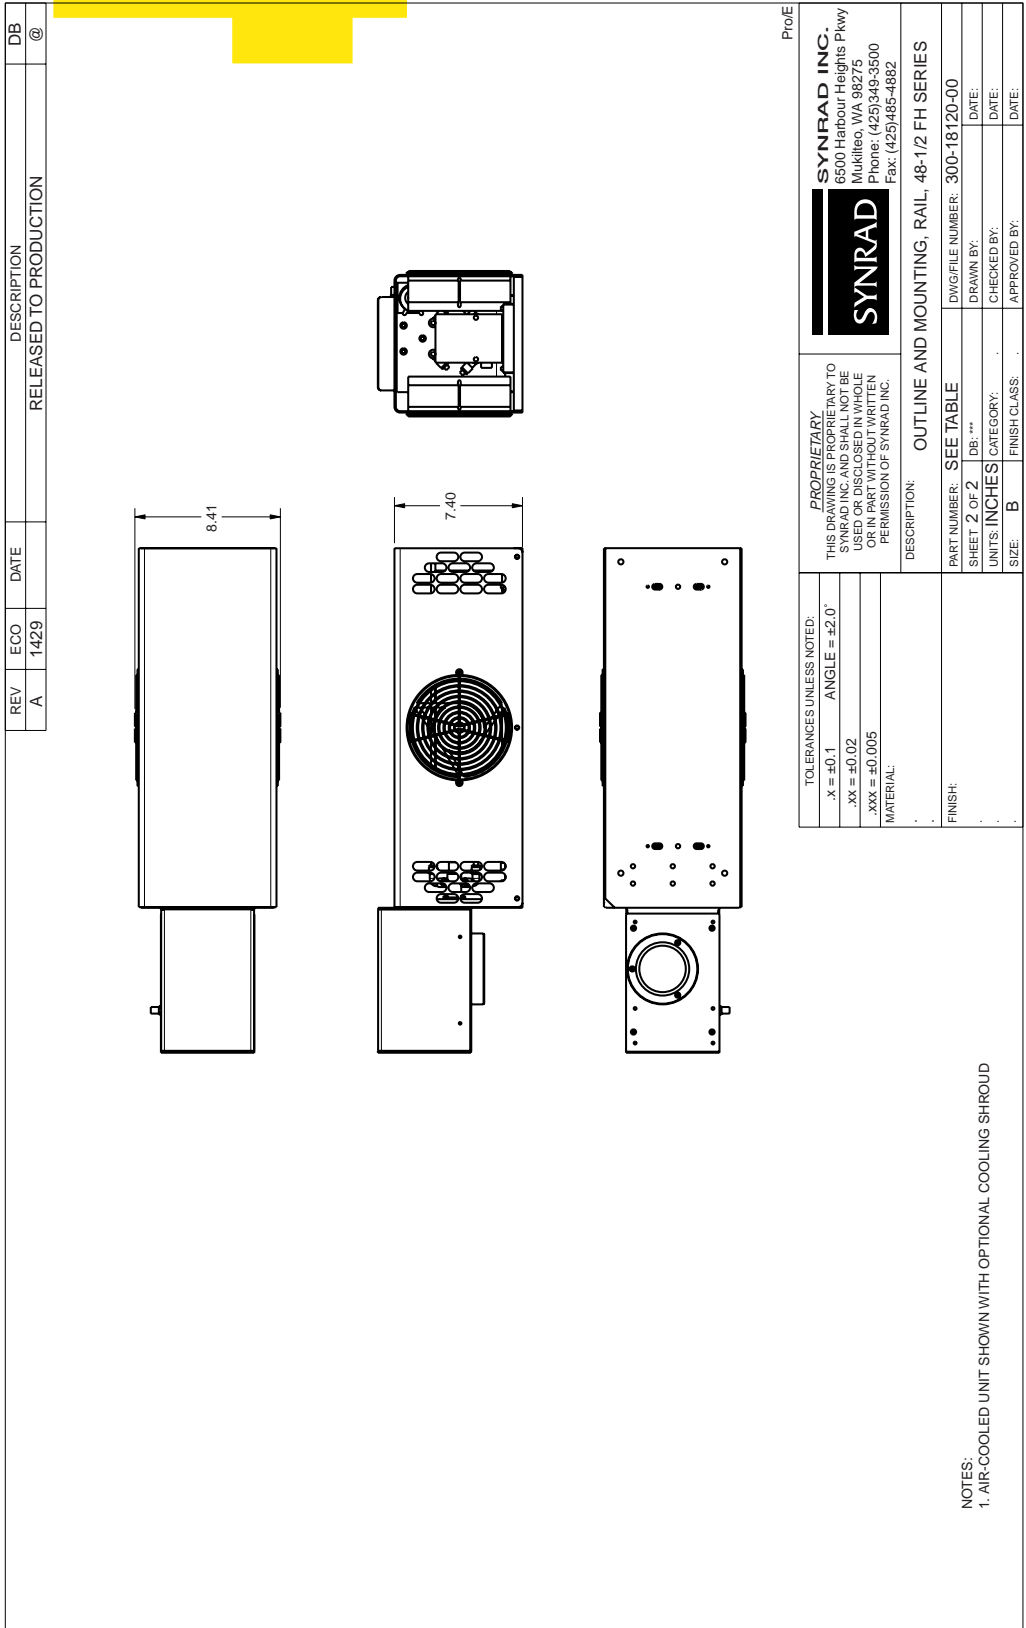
FH Head / Model 48-1/48-2 package outline and mounting dimensions
